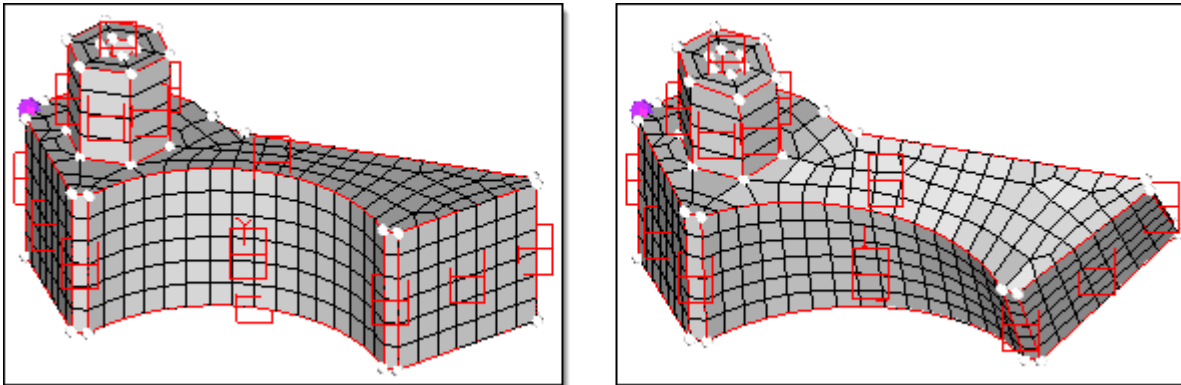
Morph by Rotating Handles for Entire Block - Linear
